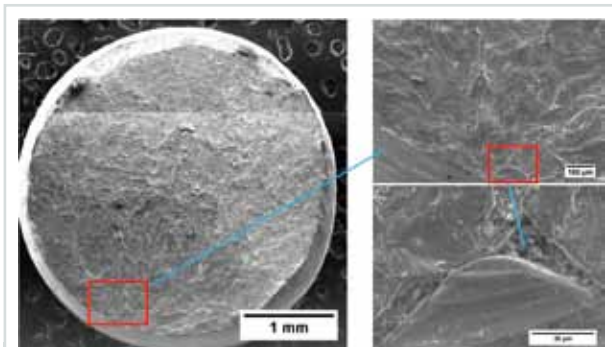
Fracture surface after fatigue test of additive manufactured 316L. Failure initiated at shown defect.
